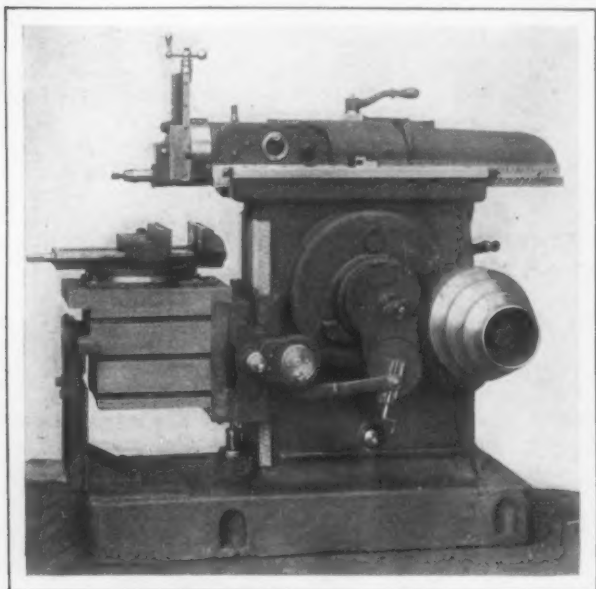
The Stockbridge 20-In. Back Geared Shaper
